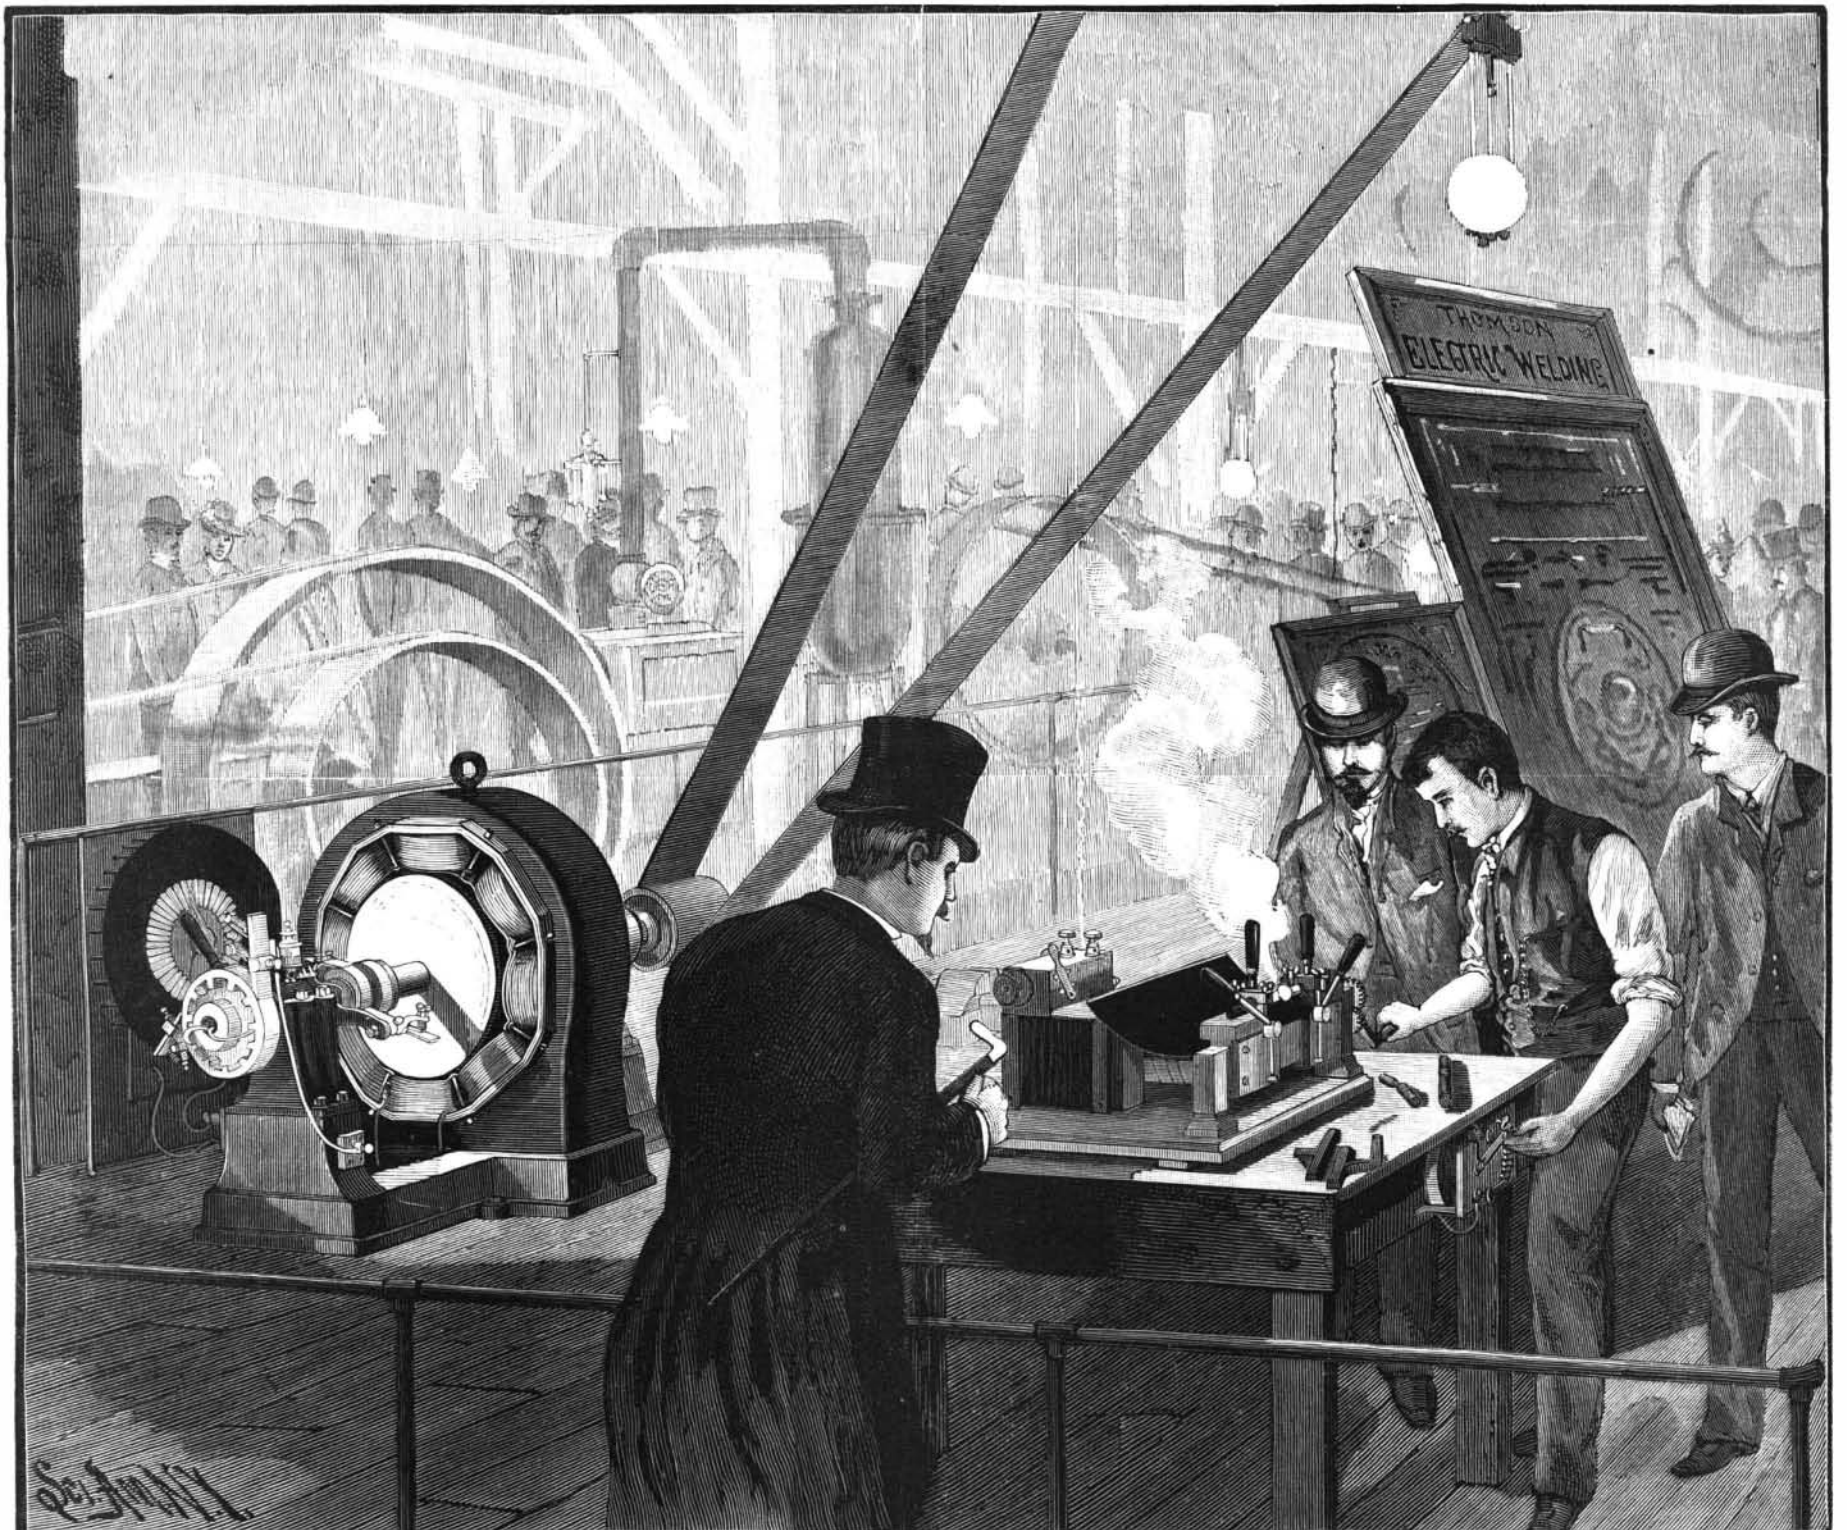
ELECTRIC WELDING AT THE AMERICAN INSTITUTE FAIR, NEW YORK.—PROFESSOR ELIHU THOMSON'S PROCESS.
